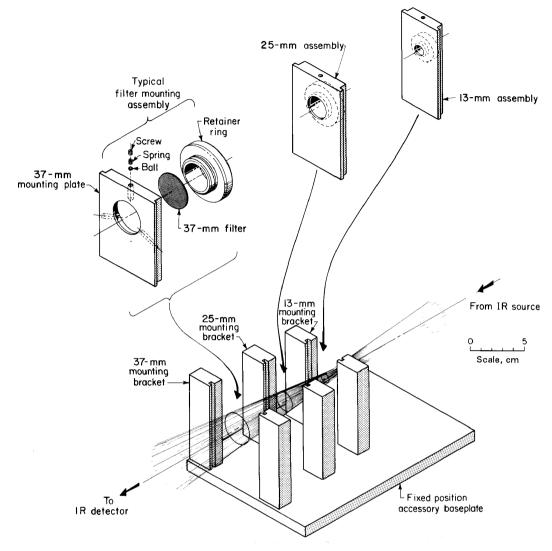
Detailed construction plan for custom accessory, with rear view showing IR beam.
